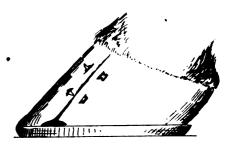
NAILS WILL HOLD THE EDGES FIRMLY
